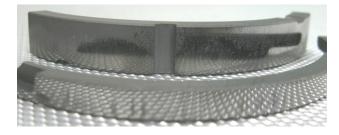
Carbon ring segments after 6h (from guide ring and pressure ring)
